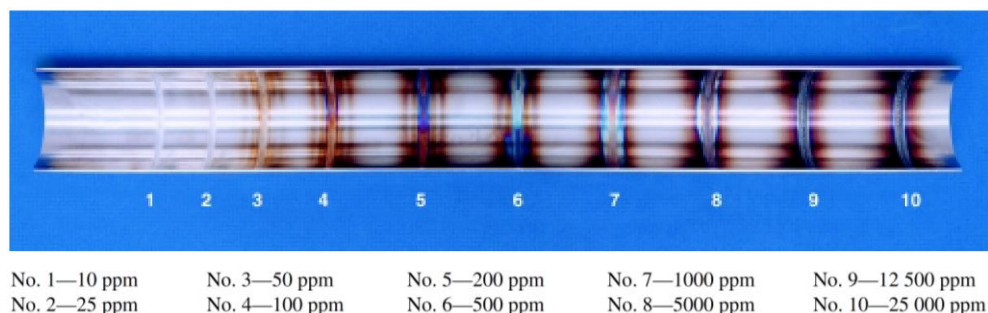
Guide for weld discoloration levels inside stainless steel due to various oxygen level [39].
